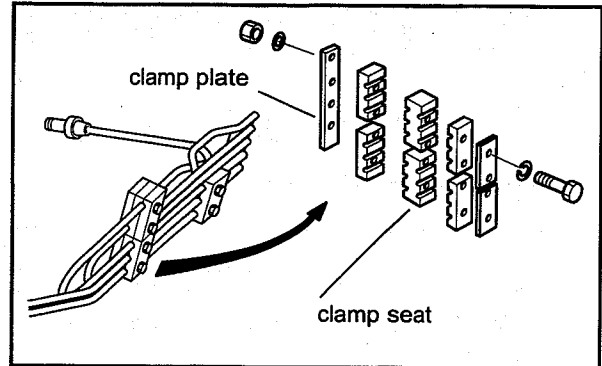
Checking and replacing high pressure fuel injection pipe and clamp seat
